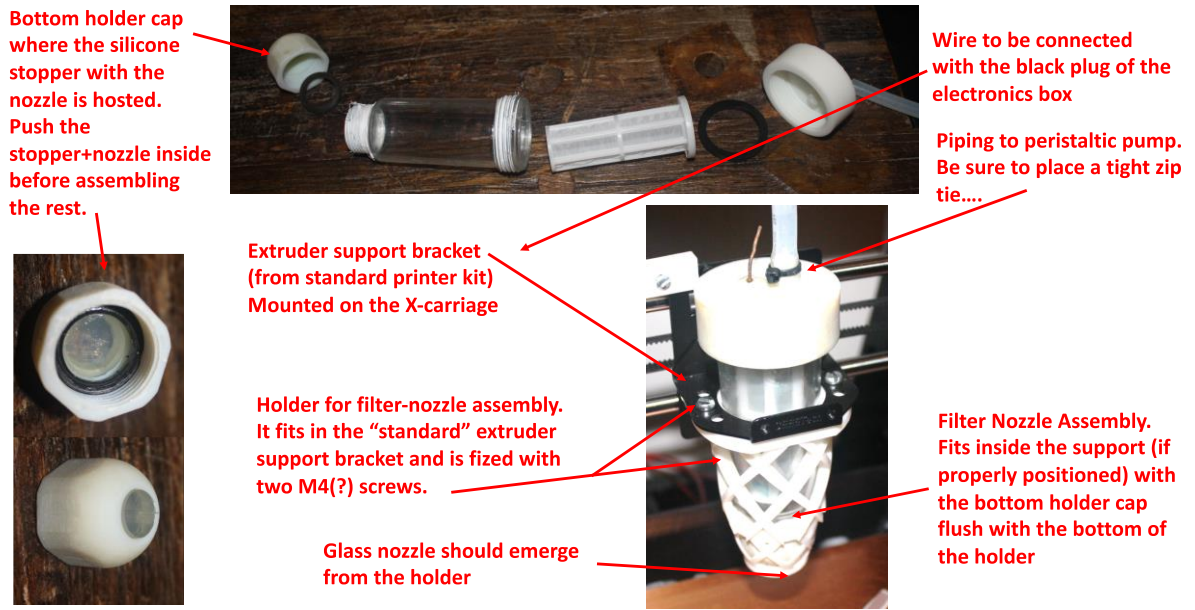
Filter-Nozzle Assembly. Source (FM3D Installation manual)
